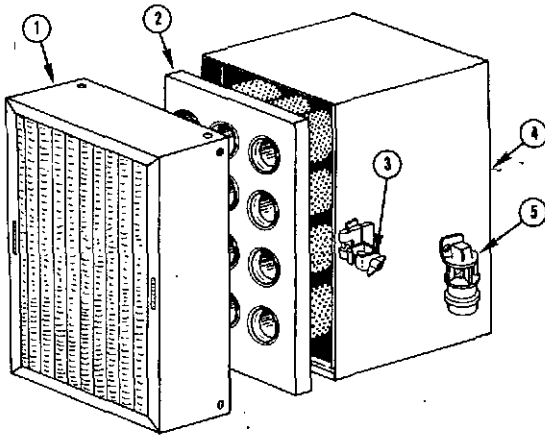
, V11009. Cartridge - type air cleaner - single stage
